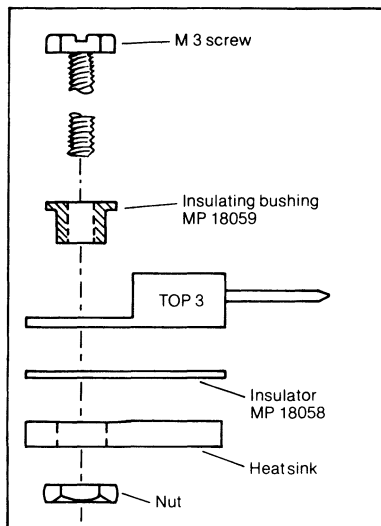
Fitting insulated mounting of the TOP 3 case by screw
